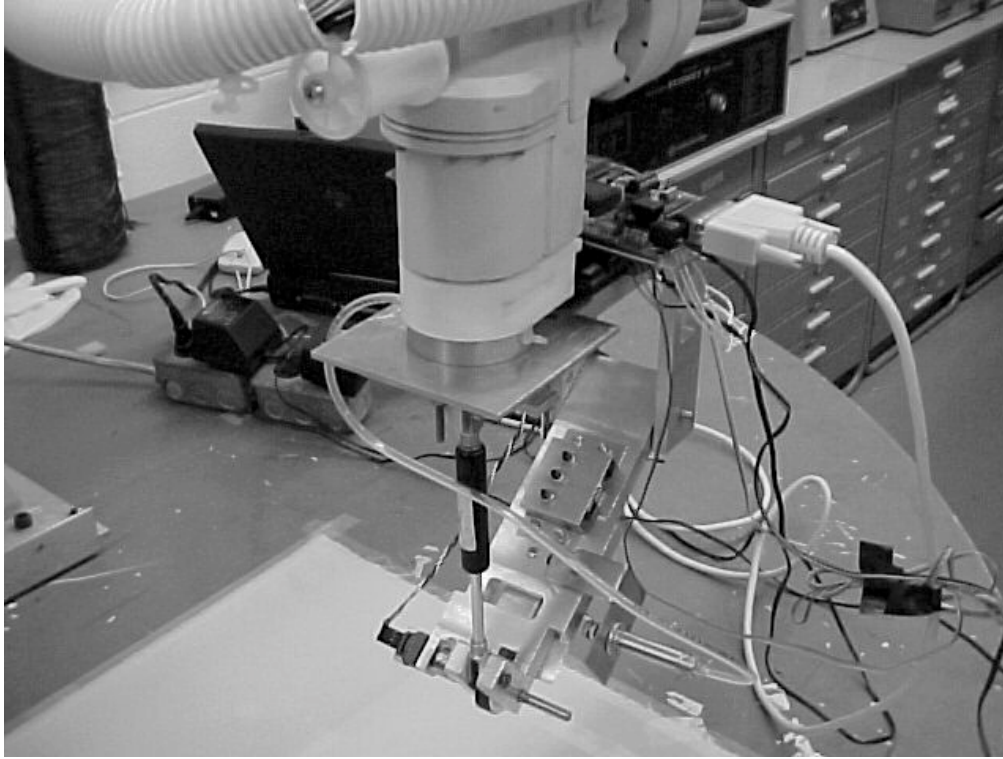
Prototype placement head – Roller and Linear Actuator
